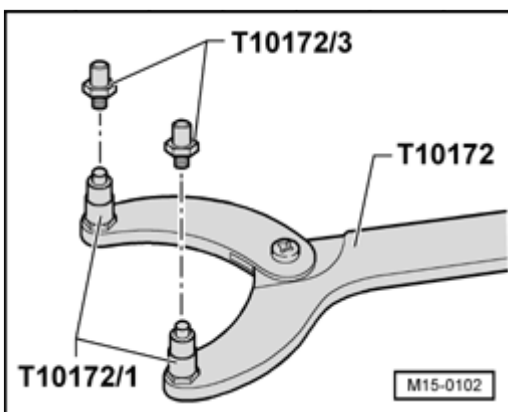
Identifying Counterhold Tool T10172, Pins T10172/1 & Pins T10172/3
